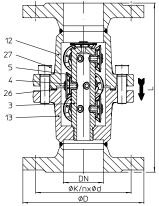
1....10K2 (DN40-50) with 10 capsules, with flanges -In-line design
